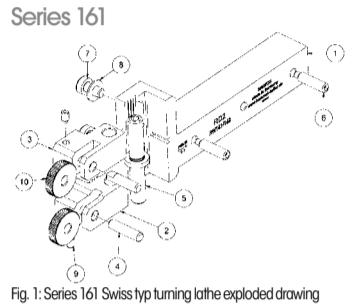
Series 161 Swiss typ turning lathe exploded drawing
